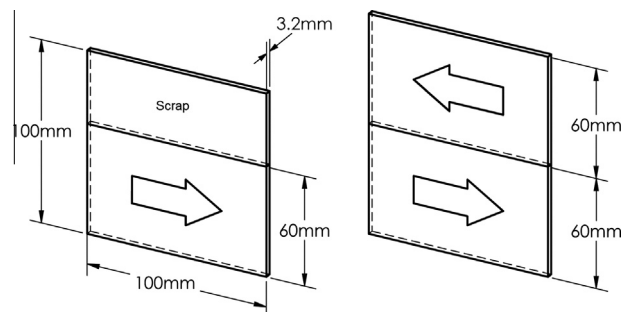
Pre-welding cut and welding alignment for nylon plaques used in butt welds [11]. The arrows denote the flow direction of the polymer melt during injection molding.
